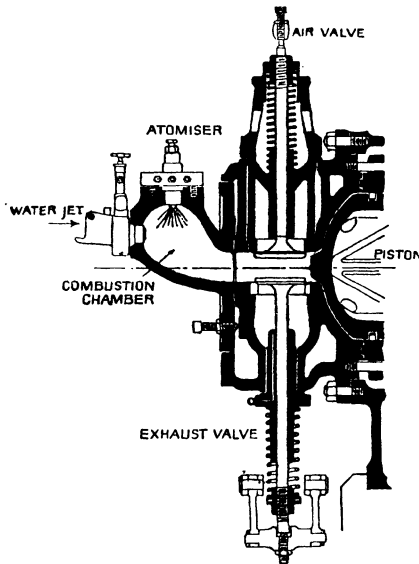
Ruston and Proctor Hot-bulb Oil Engine (1909)
